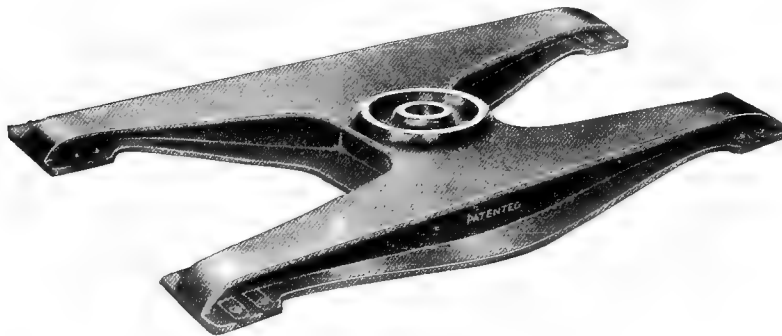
Commonwealth Cast Steel Bolster for Six-Wheel Passenger Train Car Truck. Commonwealth Steel Company
